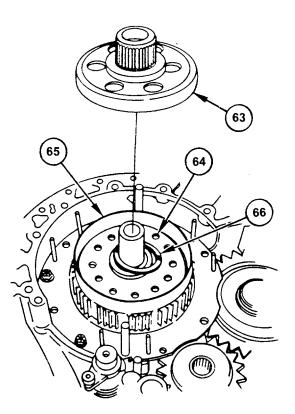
Steer Ring Gear, Output Carrier Assembly, Brake Clutch Drum.
